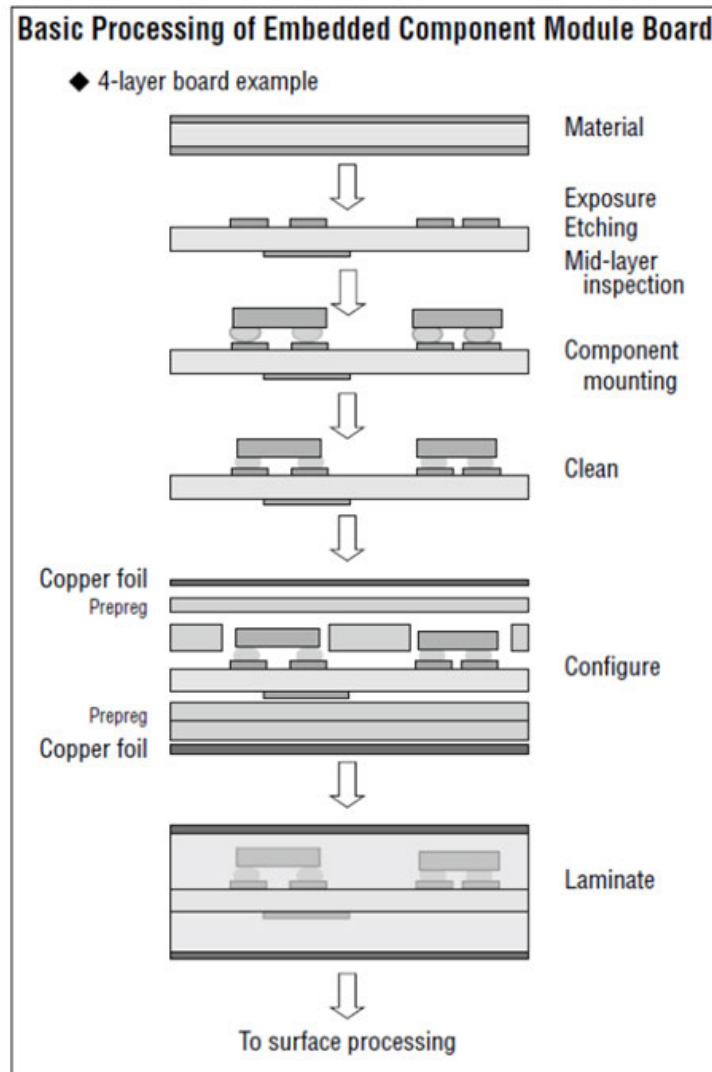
A process used for the embedding of SMD components inside a PCB [43].
